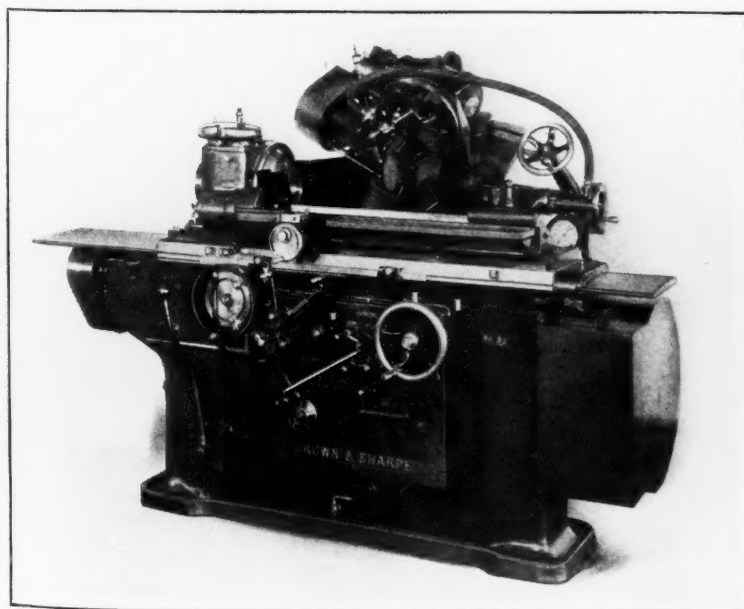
Brown & Sharpe Automatic Worm-thread Grinding Machine
